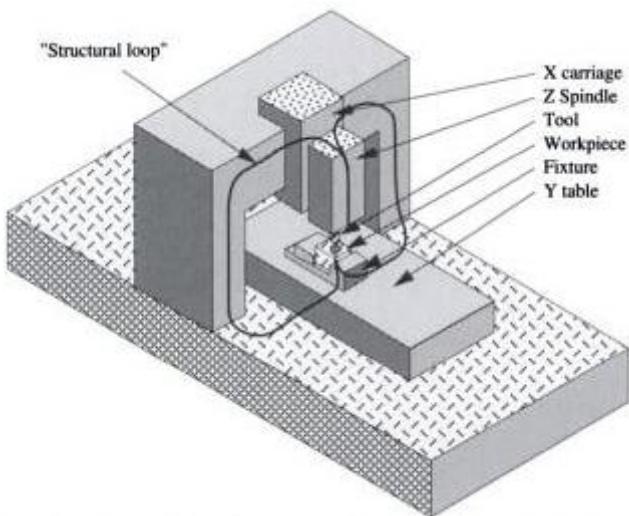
Close frame machine tool structure vertical tool position [17]
